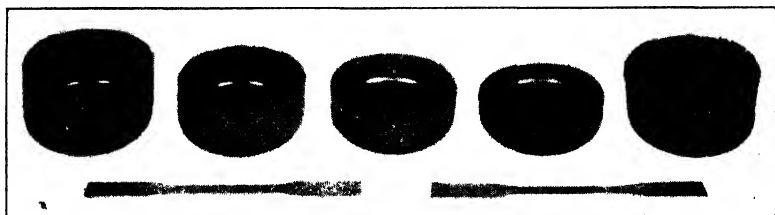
Tensile and drawing test specimens produced in exploring the stresses and changes in stresses involved in drawing to various depths and in bending and friction without drawing. Blank diameters respectively 6.5, 6, 5.5, 5 and 6.5 in.
